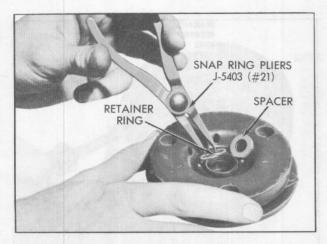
Removing Hub Retainer Ring And Spacer
